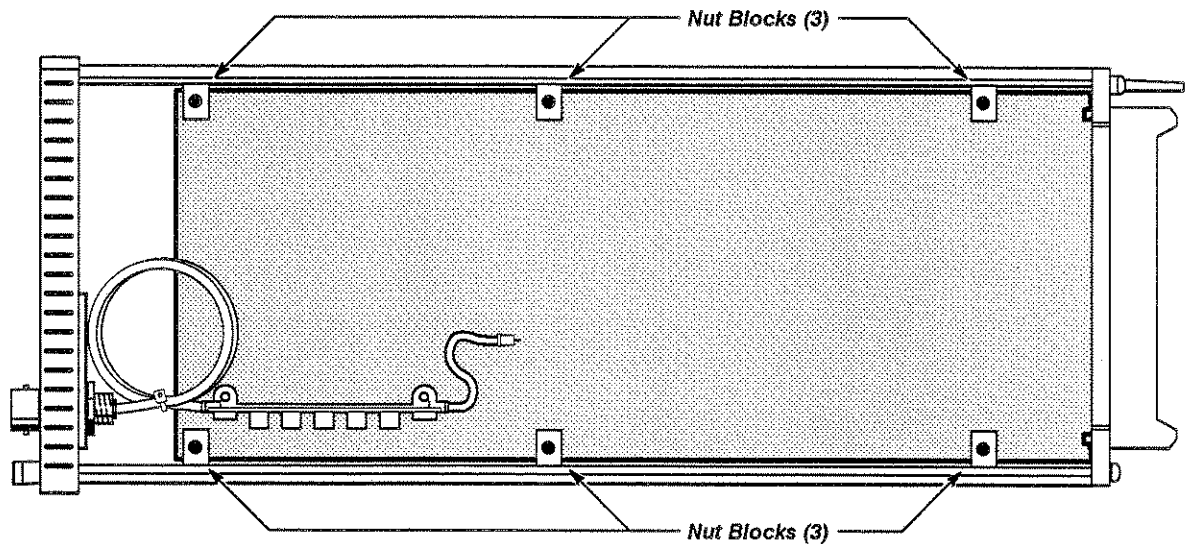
Locations of the Nut Blocks for Removal of the A1 Main Board
